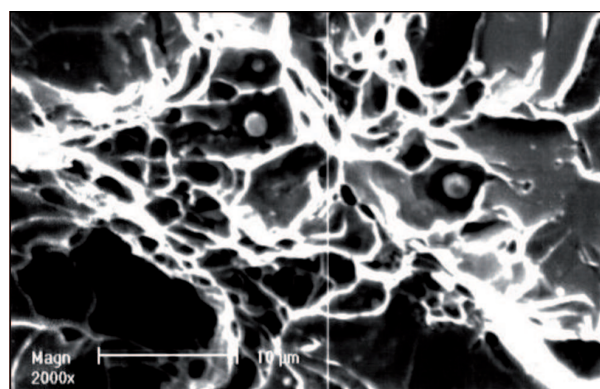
Fracture surface of weld metal deposit. (magnification 2000 $\times$ ). The photo presents the 0.6% content of Cr in the weld
